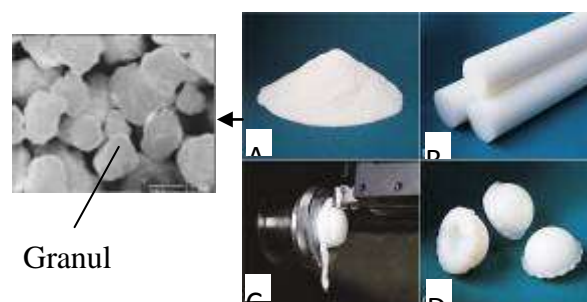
Typical processing steps in the manufacture of polyethylene UHMWPE implants: A.- the resin powder; B- semifinished rods; C- machining of the UHMWPE rods on a lathe; D- UHMWPE acetabular components after machining, after S. M. Kurtz, ref [4], [11]
